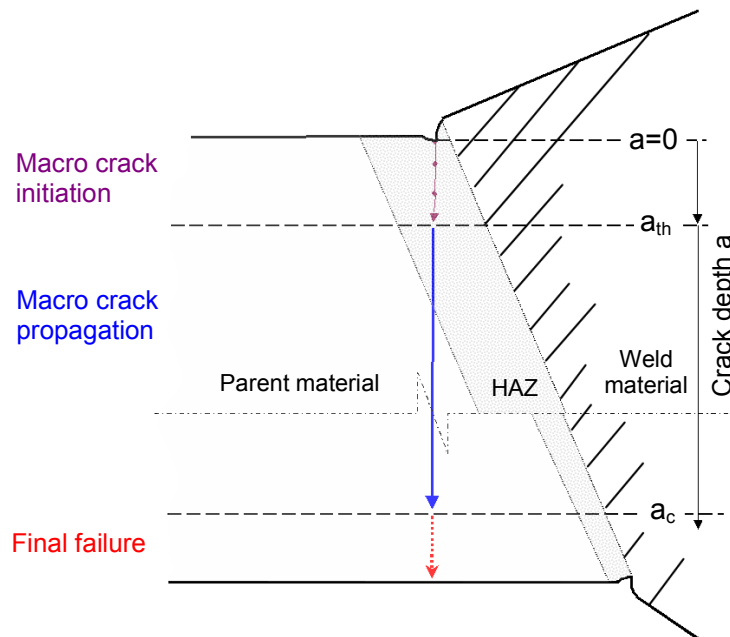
Modelling of fatigue crack growth for welded joints.
